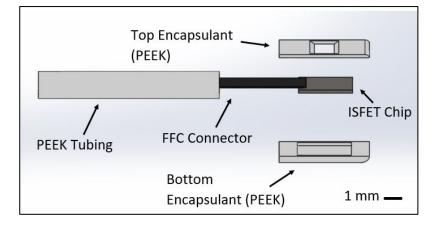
Solidworks model showing exploded view of encapsulated ISFET design. ISFET chip is held in place with epoxy and connected to a main circuit via an FFC cable.
